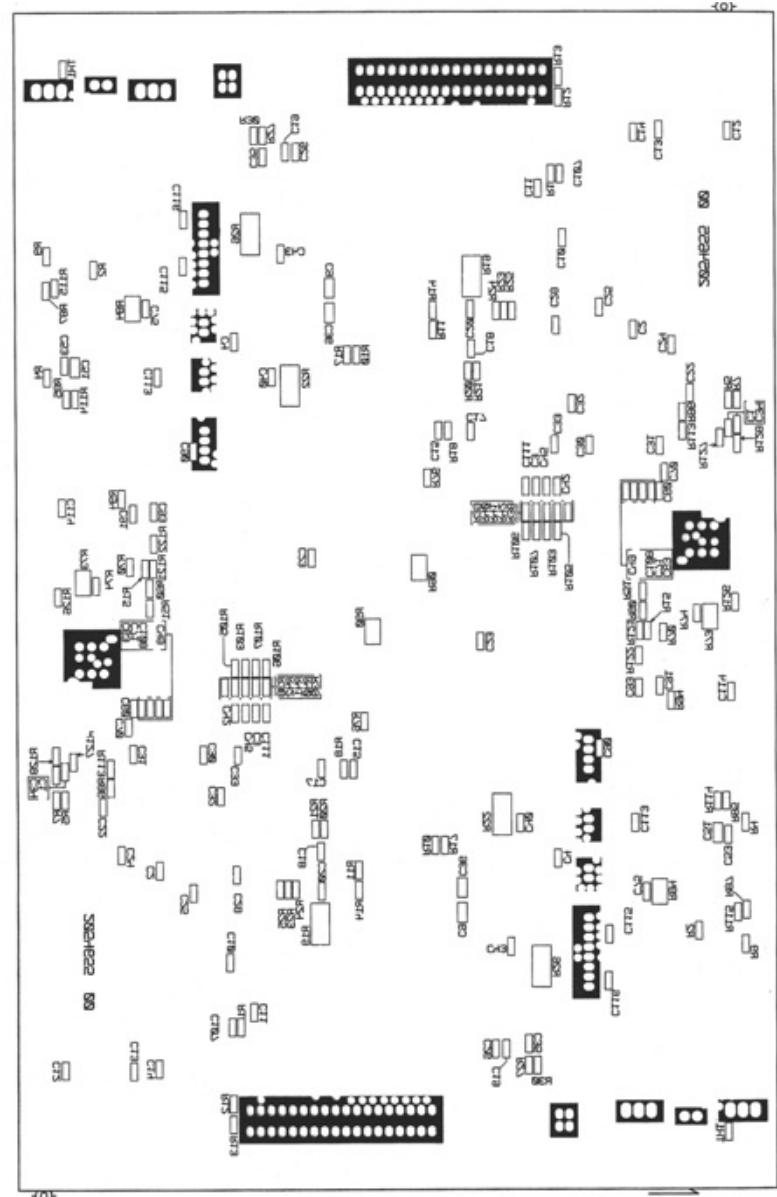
C424 MAIN-B Component Layout (Foil Side)
